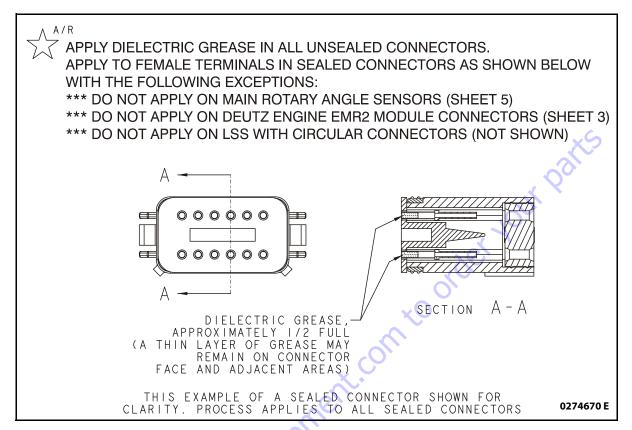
Wiring Harness Installation - Sheet 7 of 7
